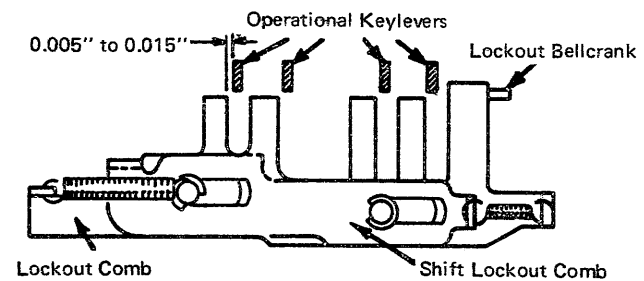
Adjusting Comb (Level 2), Keyboard Unlocked
